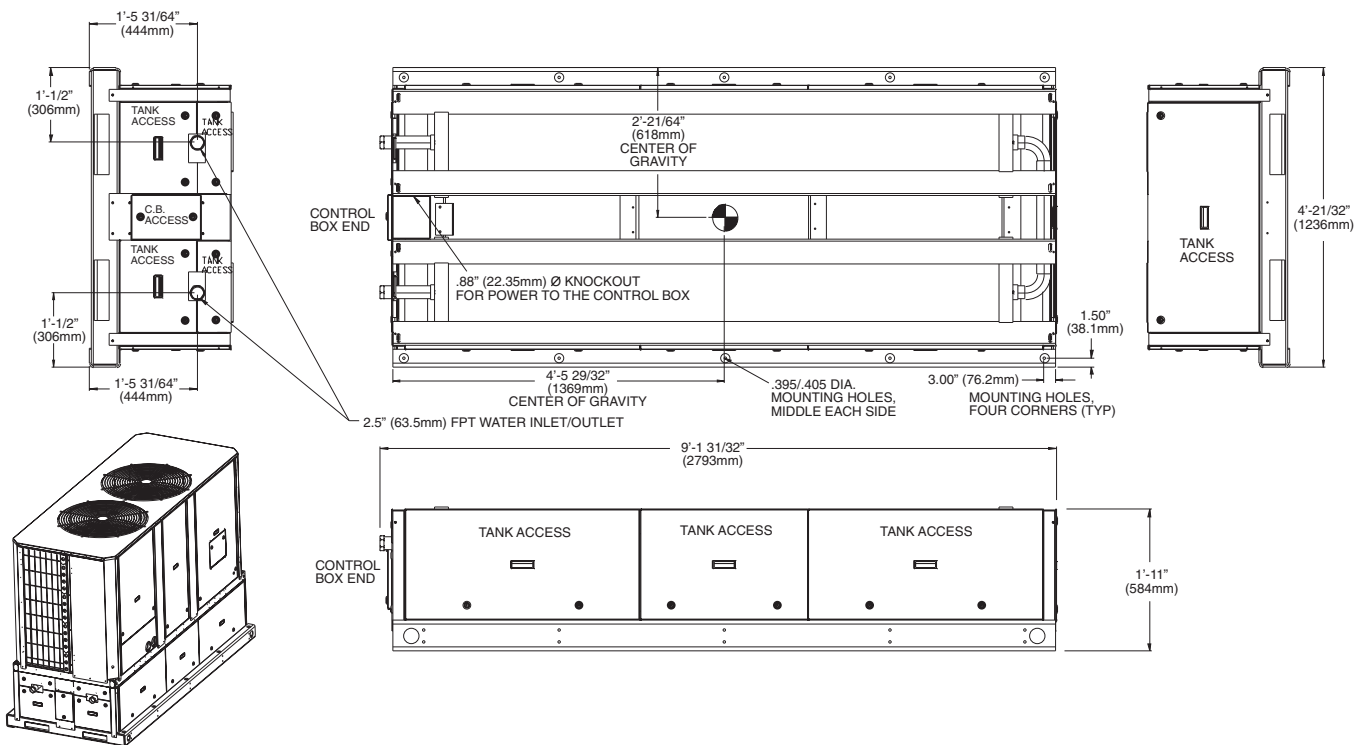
Dimensions 30RA-900---009 (Unit Sizes 022-030)
